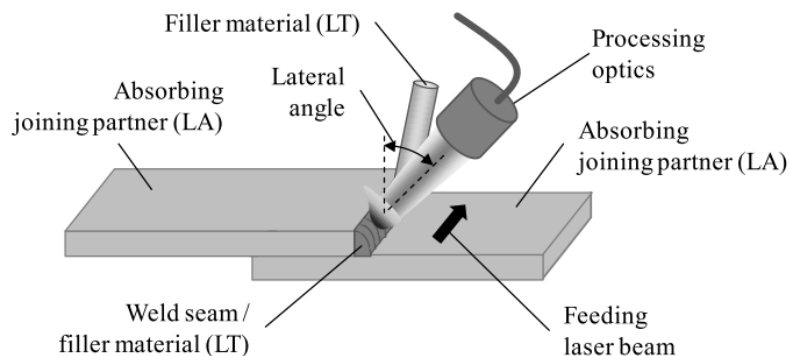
Schematic illustration of the laser transmission welding process using filler material [13].
